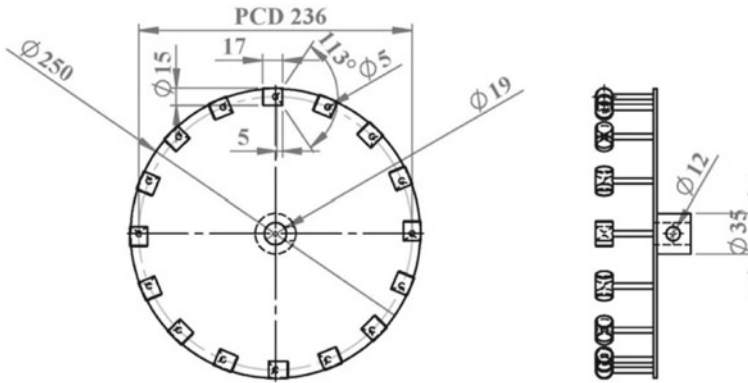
Disc design with the seed picking cups welded to it
